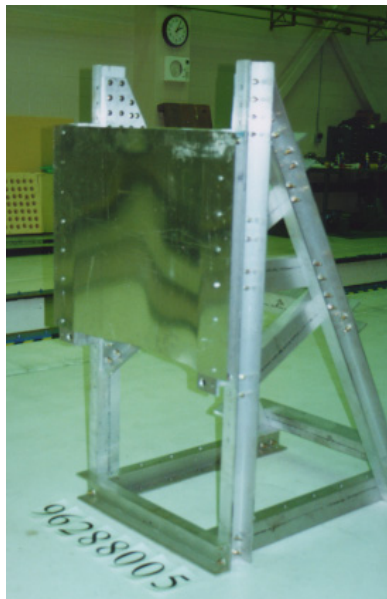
MODIFIED BULKHEAD WITH ALUMINUM SHEET PANEL
